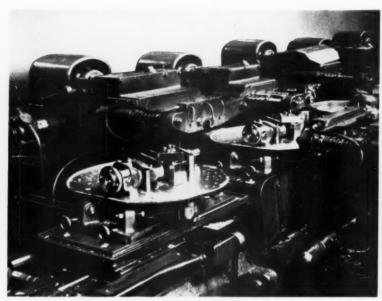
Loading station and first working stations on the transfer machine for drilling and reaming oil holes from the crankshaft main journals to the crankpins
